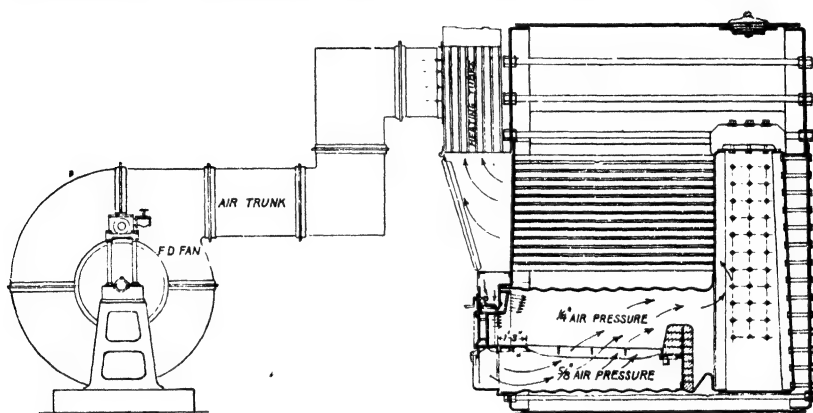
Sectional View of Marine Boiler with Regular Forced Draught
